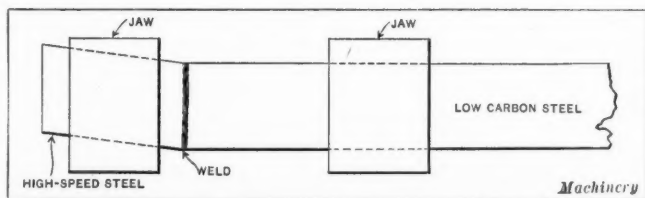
Showing the Proper Relation of High-speed Steel and Low-carbon Steel Stock in the Welder Jaws
